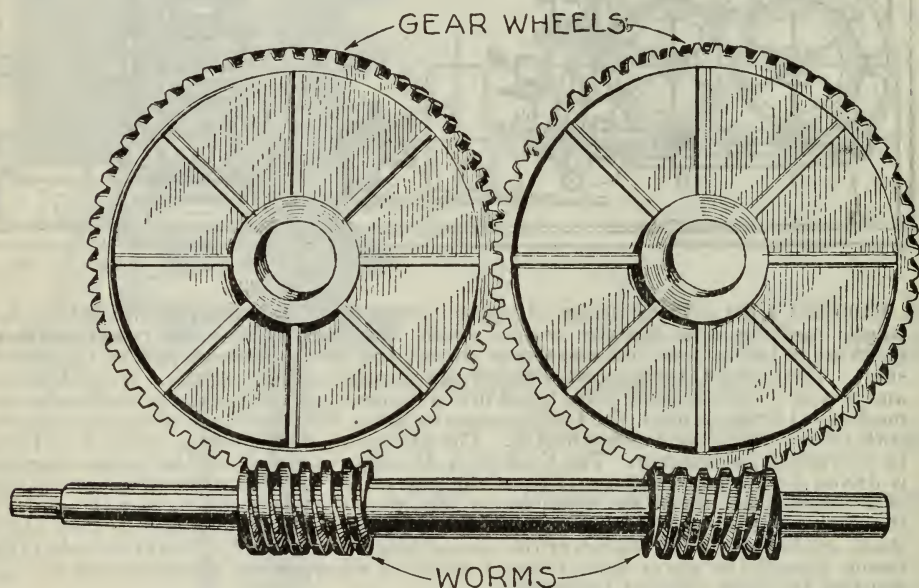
,193.—Reedy tandem worm drive. This type differs essentially from the single worm drive in that intermeshing right and left hand gears are used in place of the single gear. The use of the double gear has the advantage of dividing the pressure between the worm and gear so that greater loads and speeds are obtainable than are advisable with the single gear. The manner in which the gear wheels and worms intermesh produces, moreover, a three point contact which permits the gearing itself to compensate for any end thrust of the worm shaft, thus eliminating the necessity of thrust bearings.
